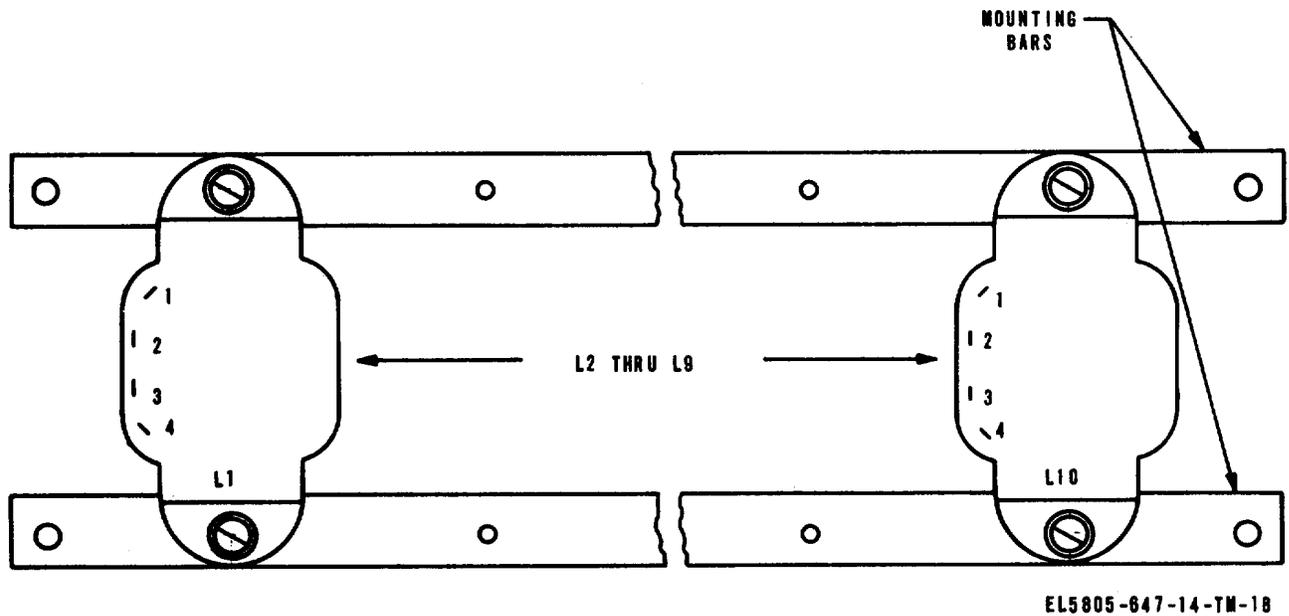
Inductor assembly (LA), mounting for expansion.
